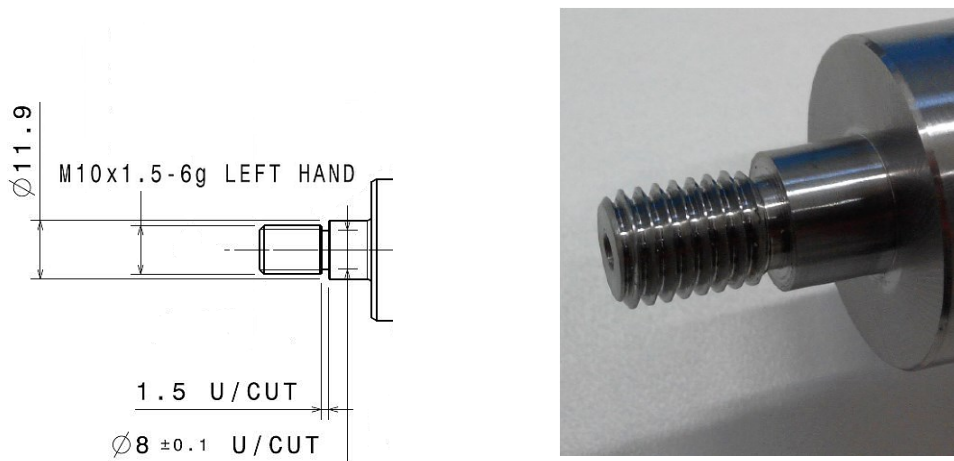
Excerpt from shaft drawing and machined shaft [1]
